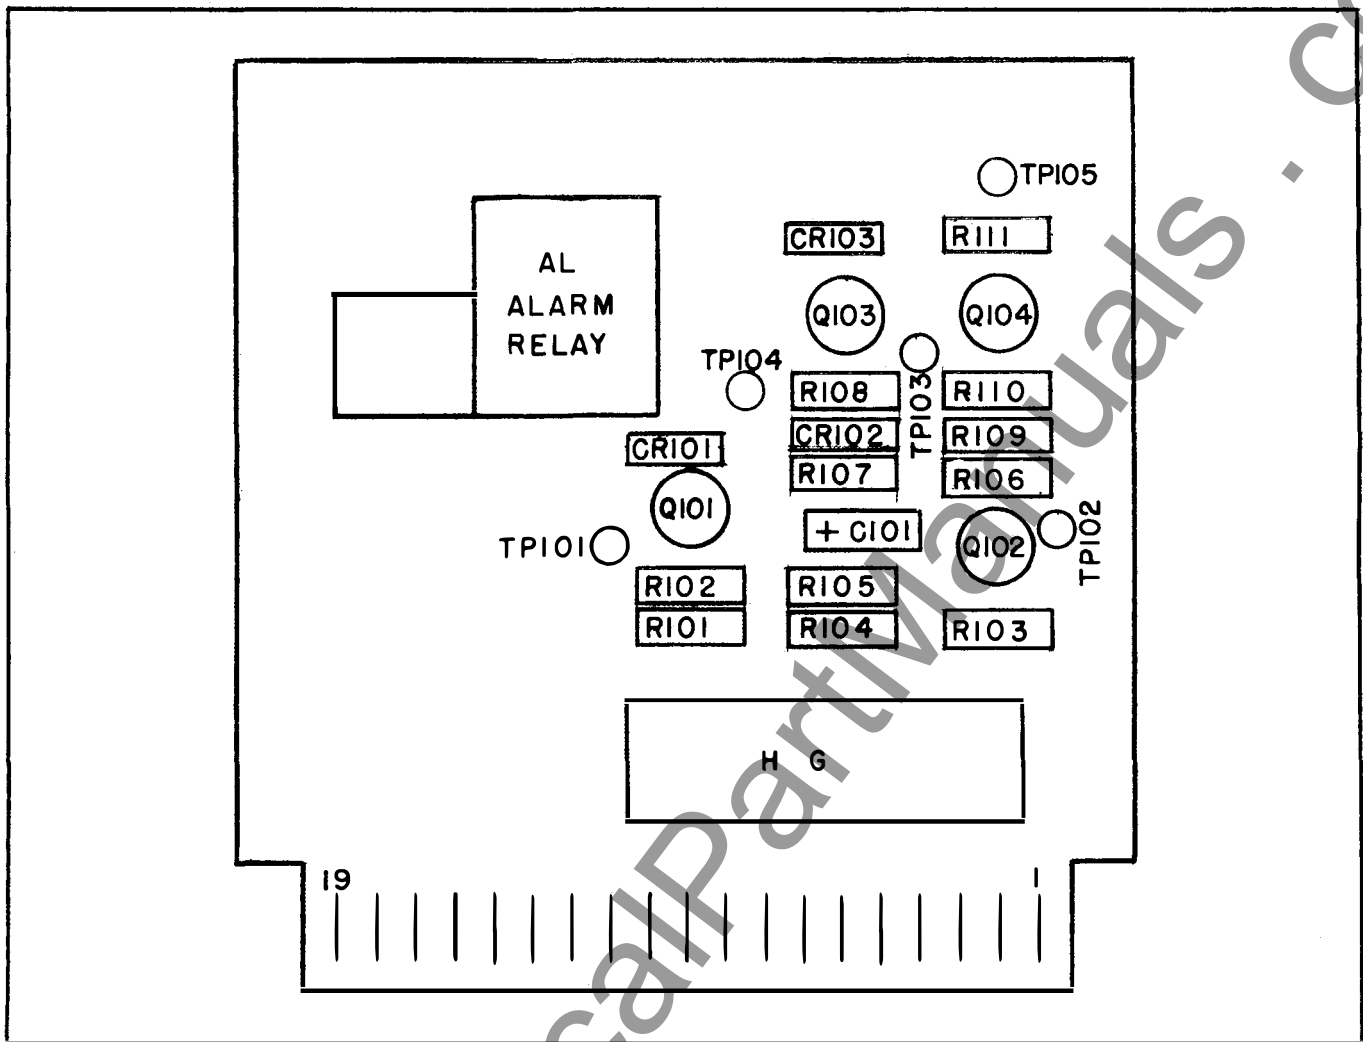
Component Locations on the Relay Output Printed Circuit Board.
